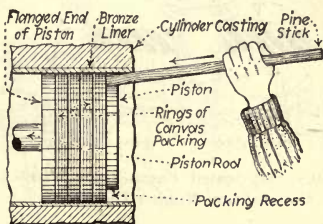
How Packing Is Inserted In Packing Recess Of Pump-Piston.
